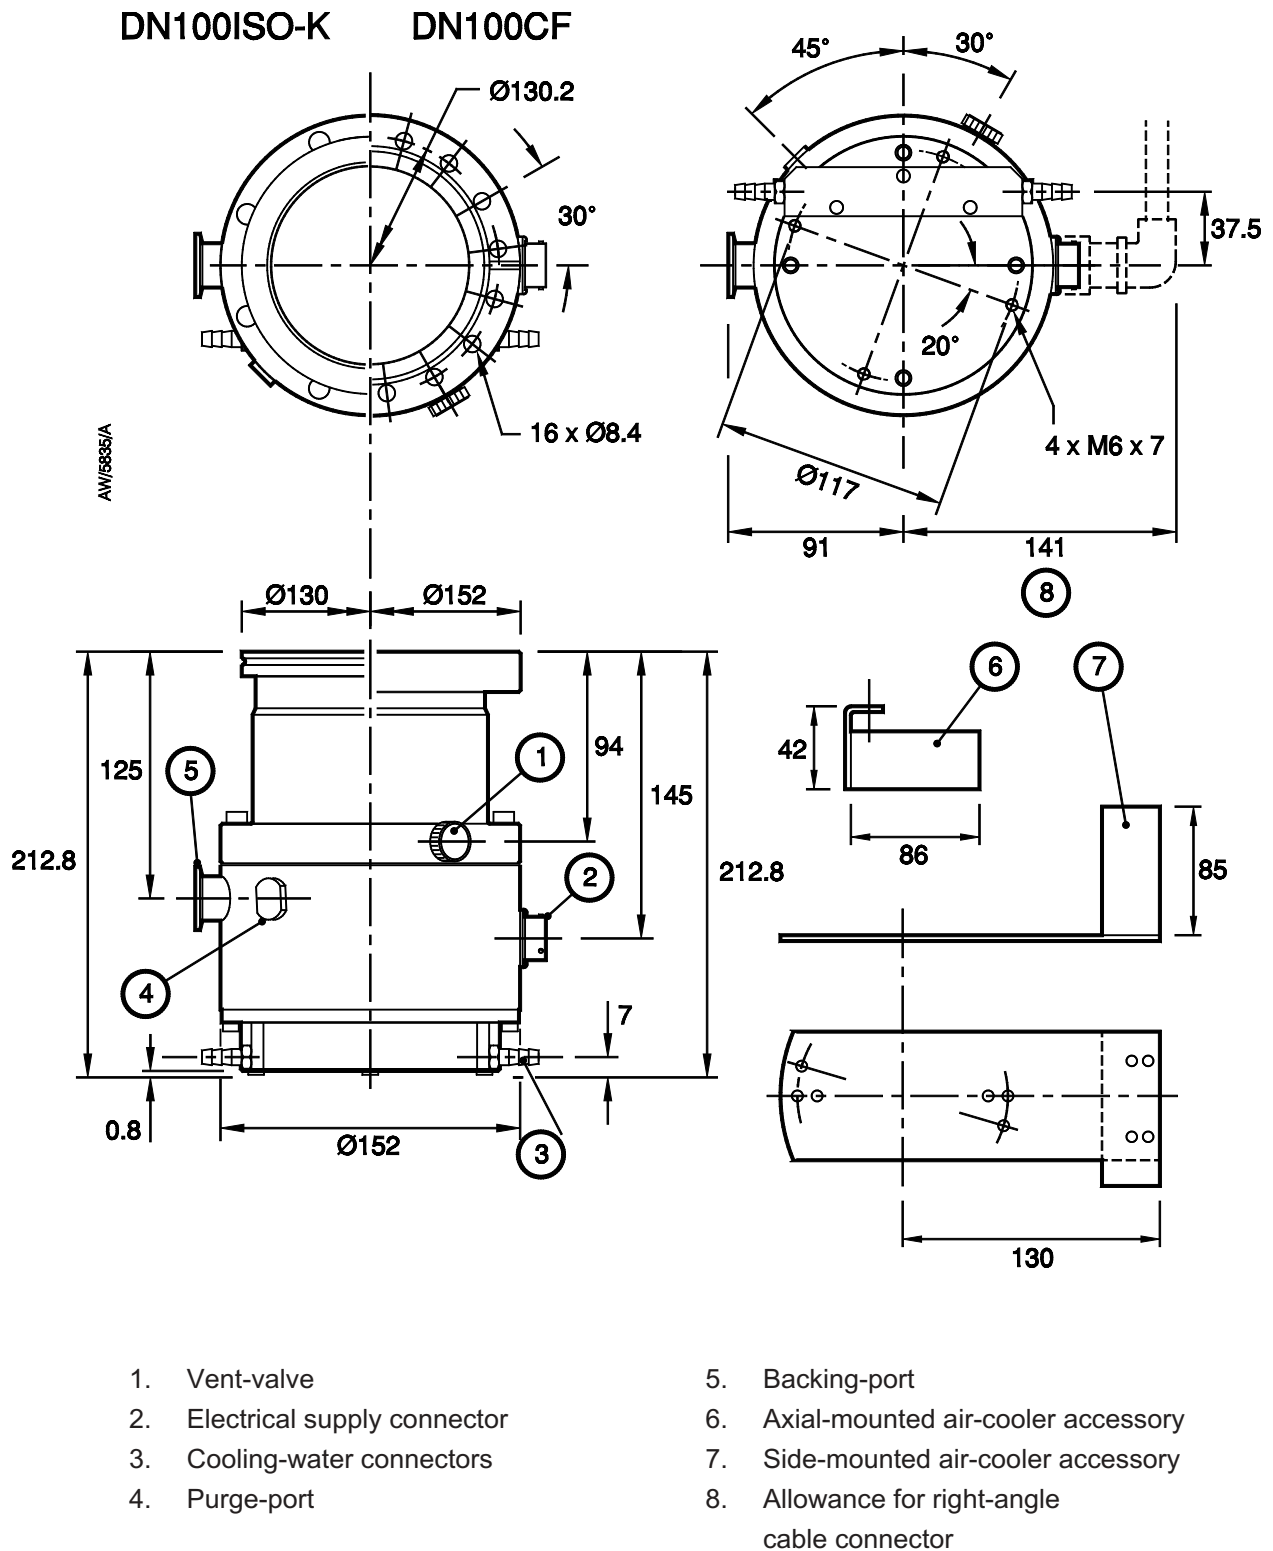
EXT250M Turbomolecular Pump dimensions (mm)
